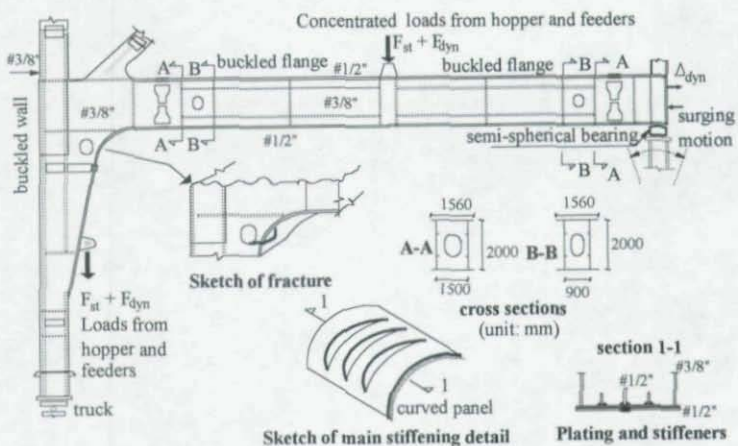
L-shaped plane frame: General characteristics and details of fatigue crack and stiffening
